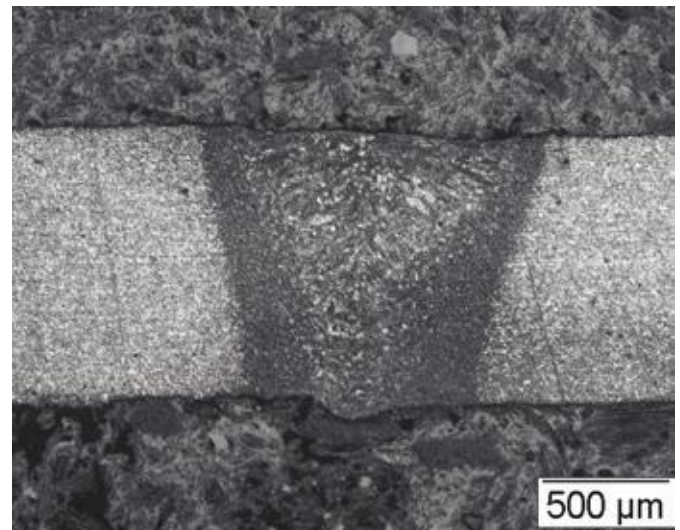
DP780 steel laser weld (30J/mm) macrostructure
